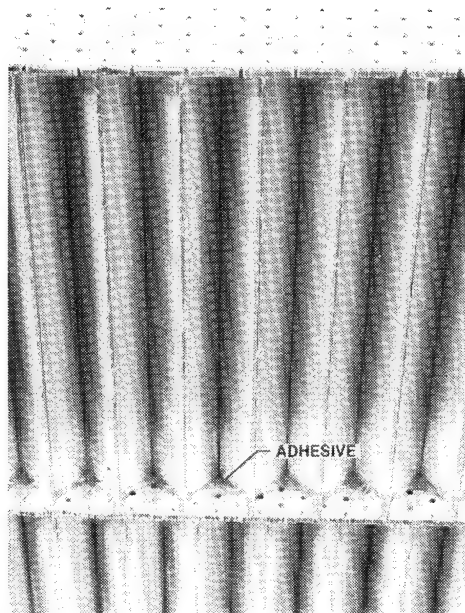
Aluminum perforate sheet bonded to 0.95 cm hexagonal aluminum honeycomb with B. F. Goodrich PL729-3 adhesive.
